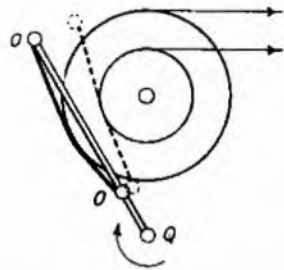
CONSTANT TENSION BOBBIN BRAKE.
